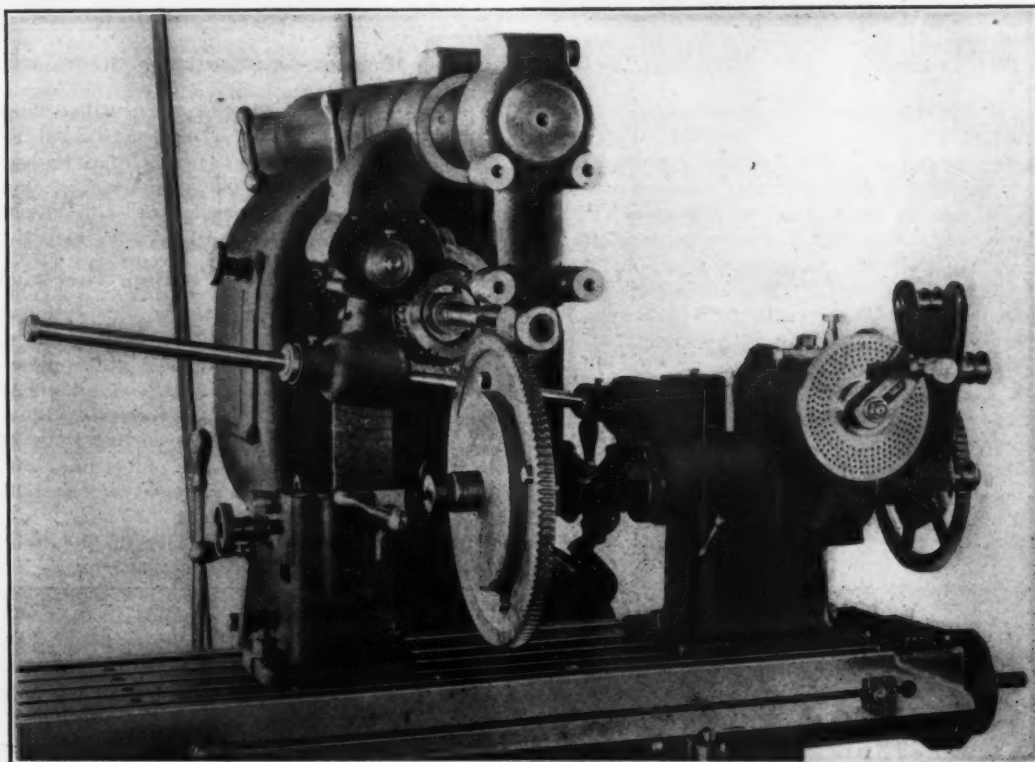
Hobbing a Large Worm Wheel on a Milling Machine with the New Attachment Made by the R. K. Le Blond Machine Tool Company, Cincinnati, Ohio.
